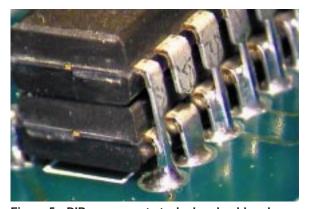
DIP component stacked and soldered onto another DIP component. One lead shown clipped. Note: Leads of added component should not be inserted into the plated holes.
